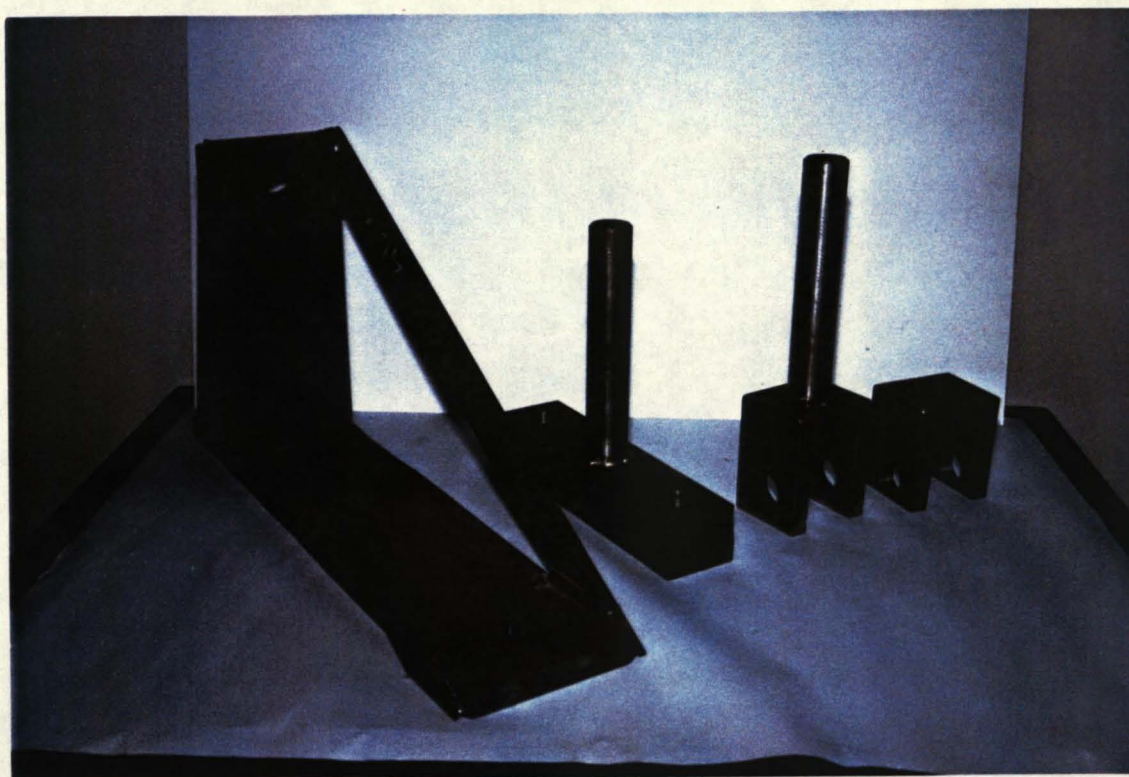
Support Frame and Apparatus Used with Avery Test Machine
